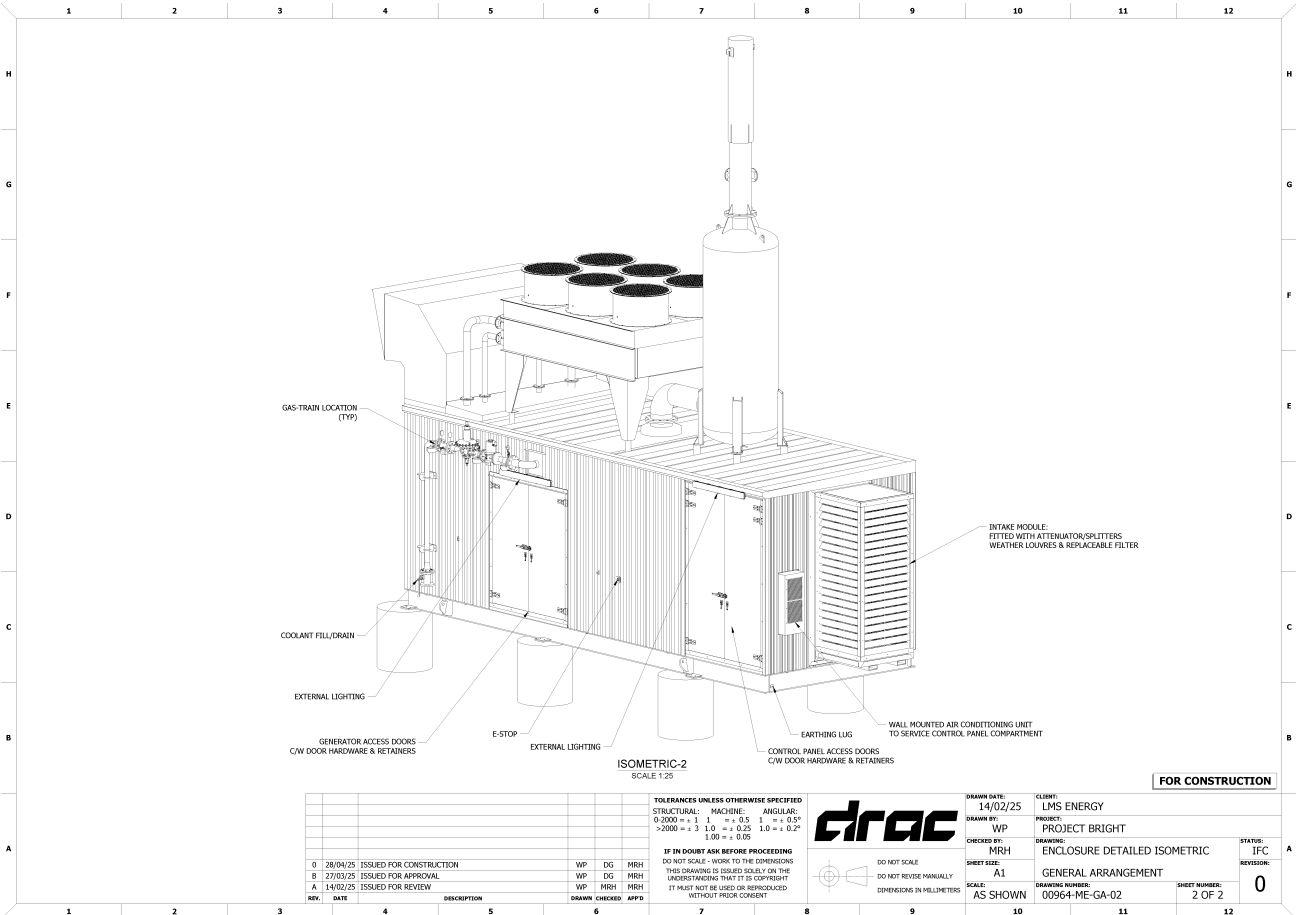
G3516 LE Generator enclosure: Isometric view 2
